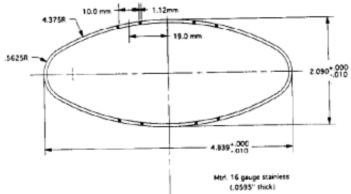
Engineering drawing of the Fermilab Main Injector beam pipe. The cross section is nearly elliptical.
